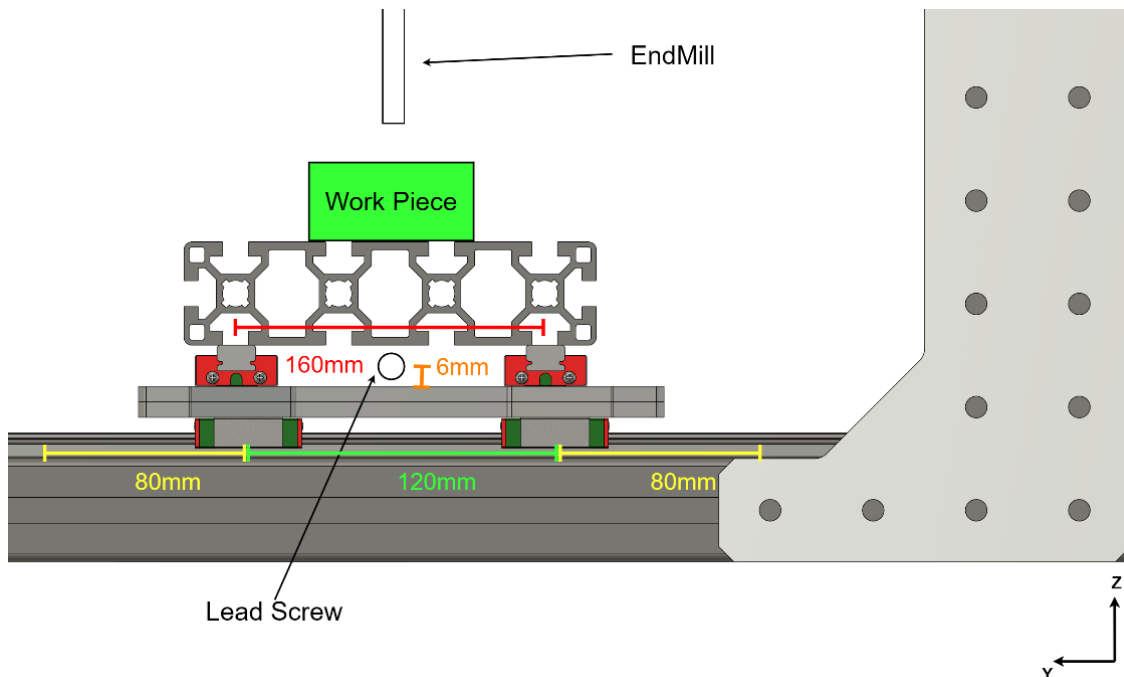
Side view of the machine, where both X and Y axis are equipped with MNG15H linear rail assemblies. All distances and measurements can be easily identified and prompted into the linear rail configurator tool.
